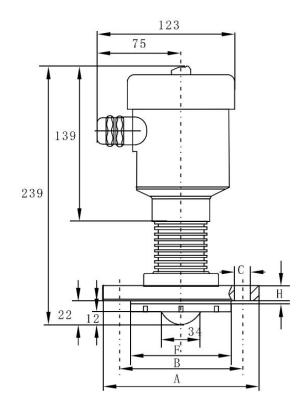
Dimensional Drawing of Corrosion-Resistant Flange Structure, Standard Temperature and Pressure (Unit: mm)
